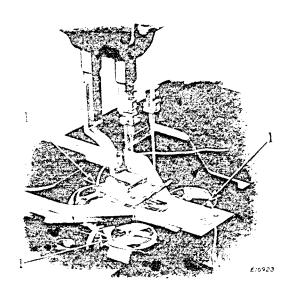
Threading the Bobbin Cases in Machines 131w103, 131w110 and 131w111
